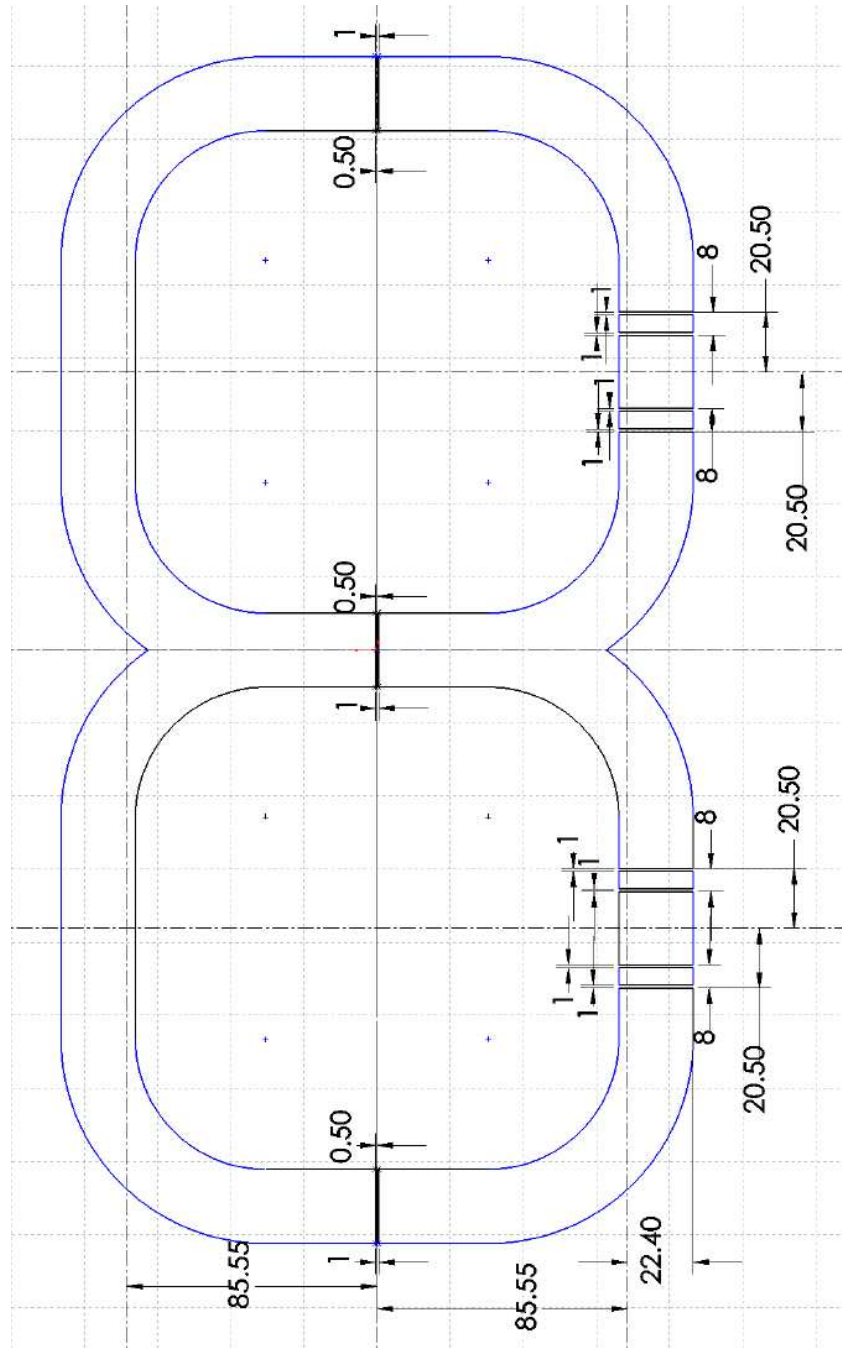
Dimensions of the combined base ring member of the 4-channel breast coil. All dimensions are in mm
